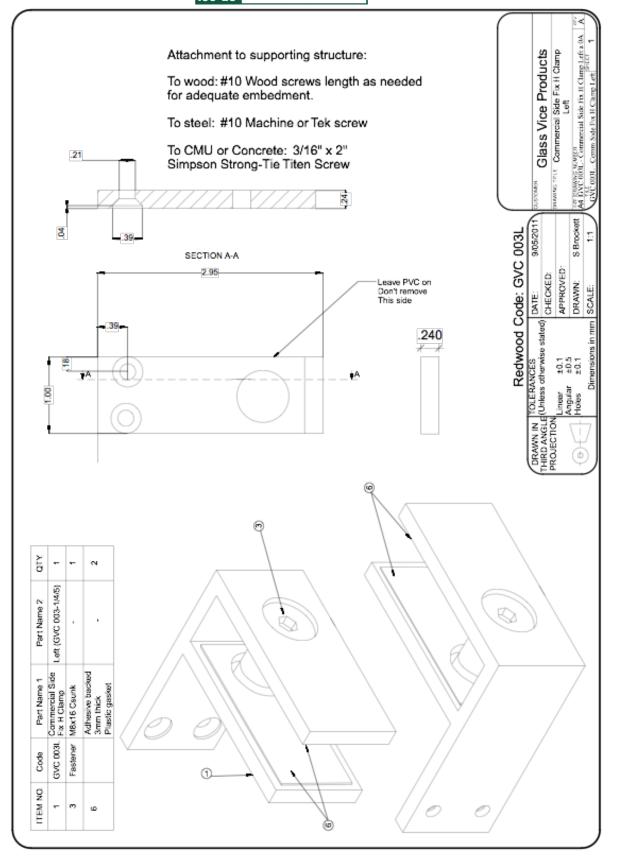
TERMINATION BRACKET WITHOUT HANDRAIL
